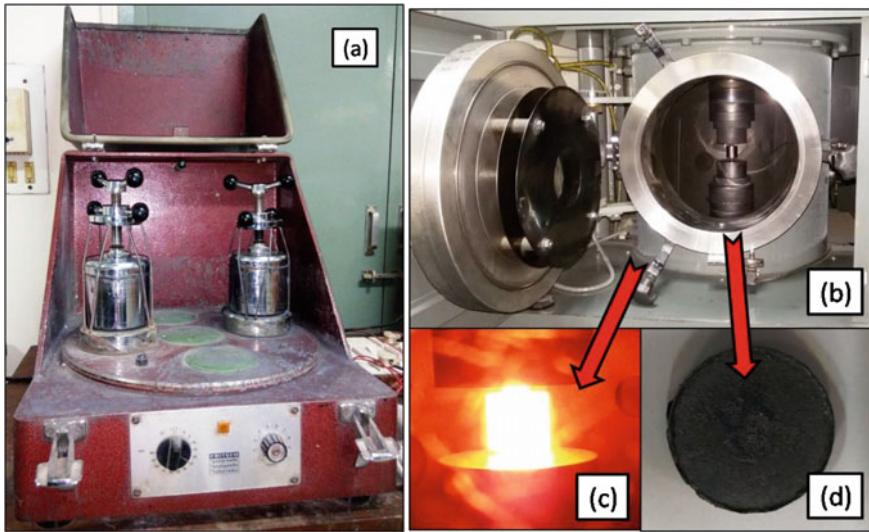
a Ball milling setup, b Spark plasma sintering (SPS) machine, c Graphite die-punch assembly in heated condition, d Prepared SPSed sample
